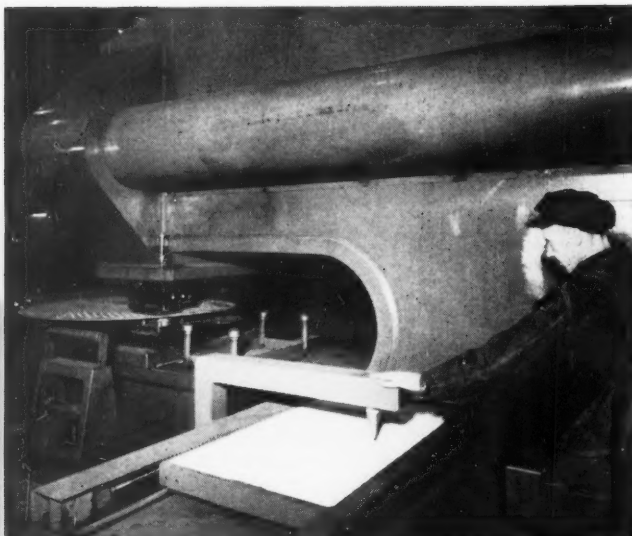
"Electric eye" punch press. Mechanism for light beam is under operator's hand.
